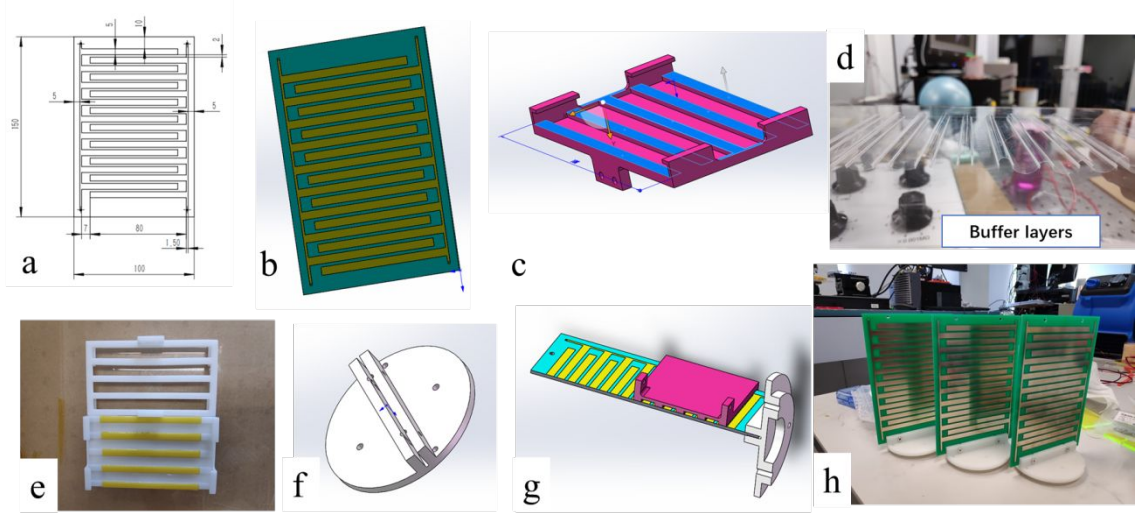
(a) The drawing of PCB. (b) The 3D plot of PCB. (c) The 3D plot of slider. (d) The fabricated slider with FEP membrane. (e) The 3D printed slider. (f) The 3D plot of mount base. (g) The schematic of NL-TENG. (h) The fabricated PCB and mount base.
